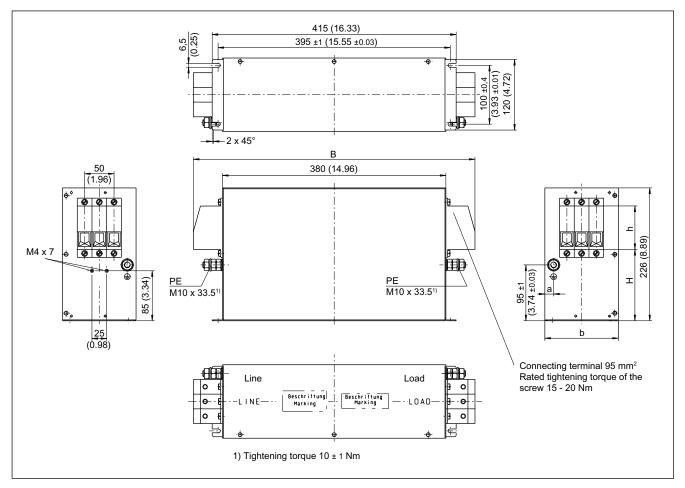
Dimension drawing of Basic Line Filter 80 kW and 120 kW, all dimensions in mm and (inches)
